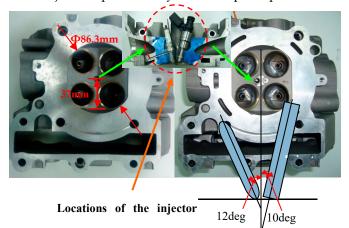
(a) Cylinder head of Fig. 1(b) Cylinder head of the the PFI engine GDI engine after modification
